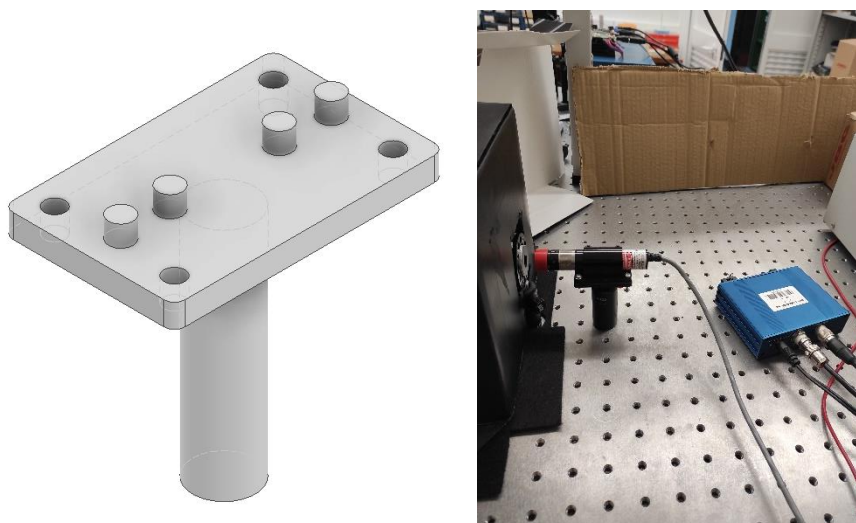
Design of the Bioray Coherent laser diode base (left). Assembly of the imprinted object in the optical table, with a compatible post holder (right).
